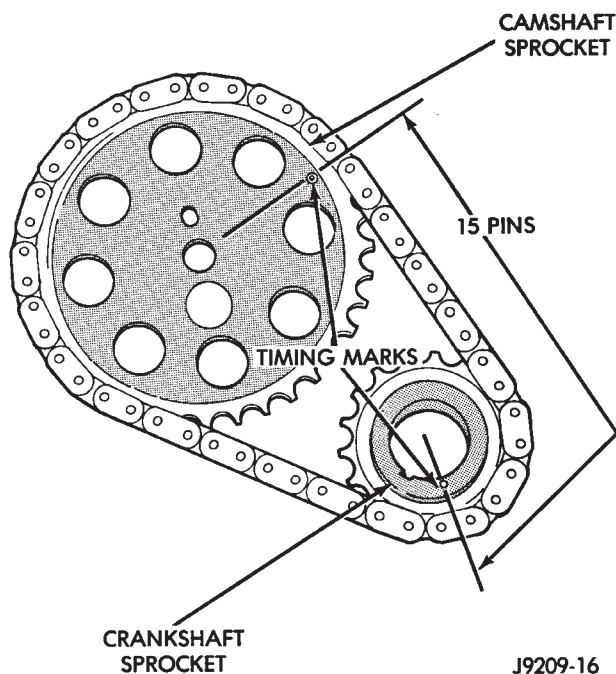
Verify Crankshaft—Camshaft Installation—Typical
